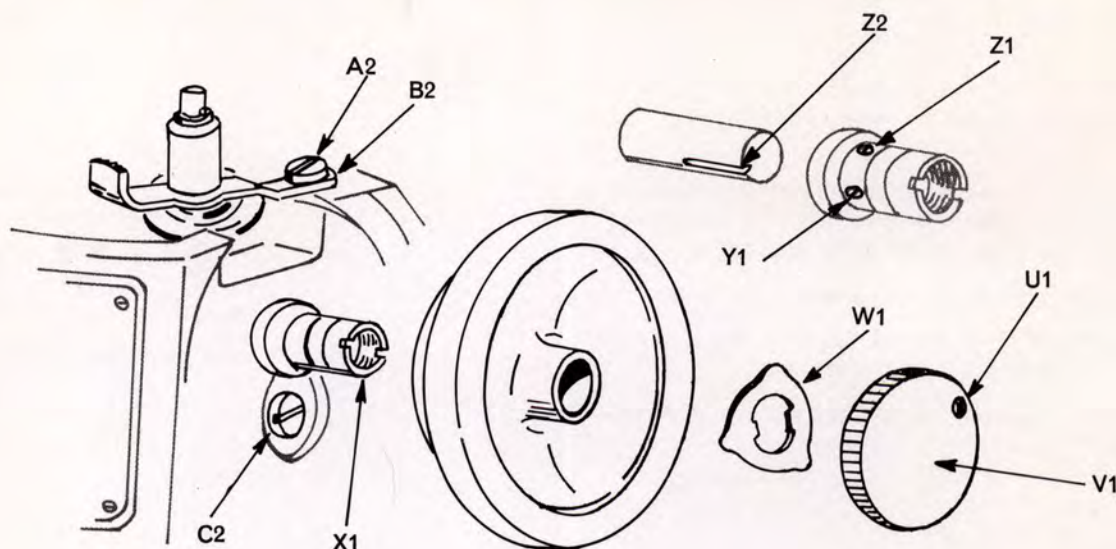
Hand Wheel and Bobbin Winder Assembly.
